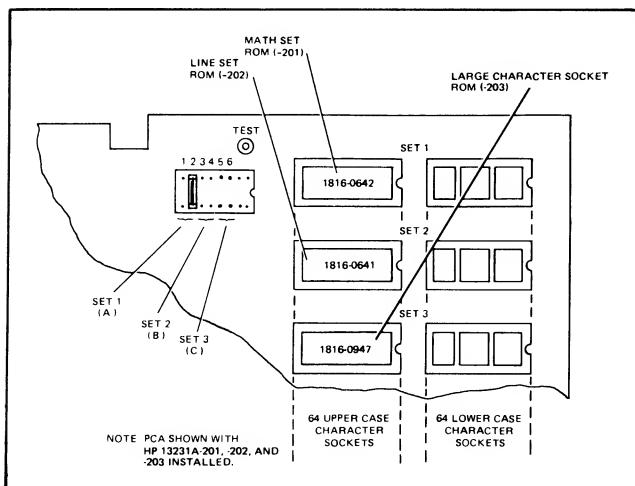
Display Expansion PCA Jumper and ROM Socket Locations
